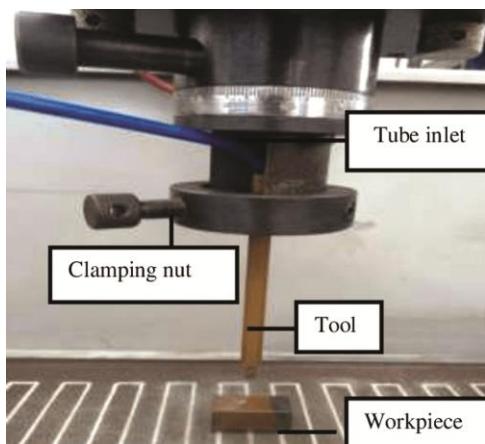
Enlarged view of Tool setup for PMND-EDM.
